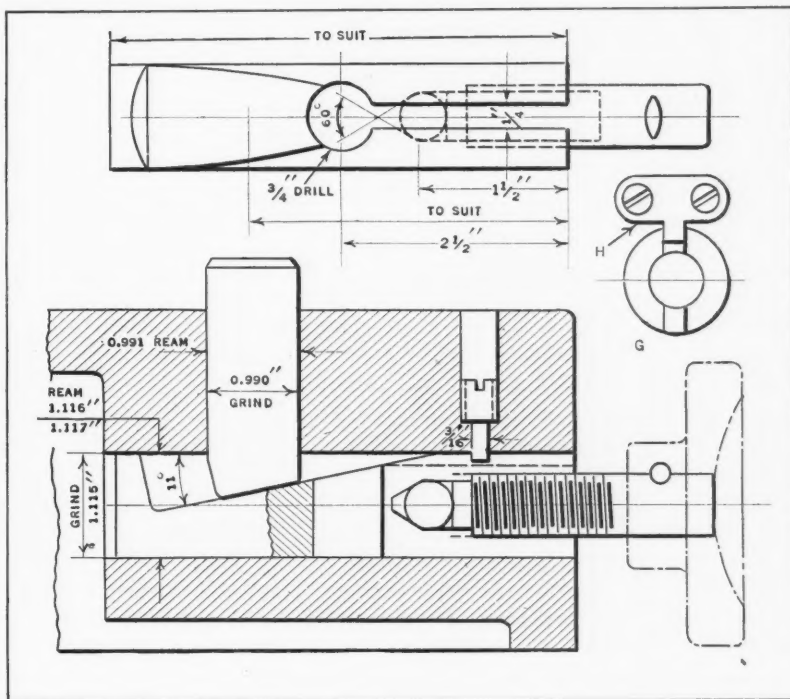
Type of Work-supporting Pin Used Near Edge of Fixture
